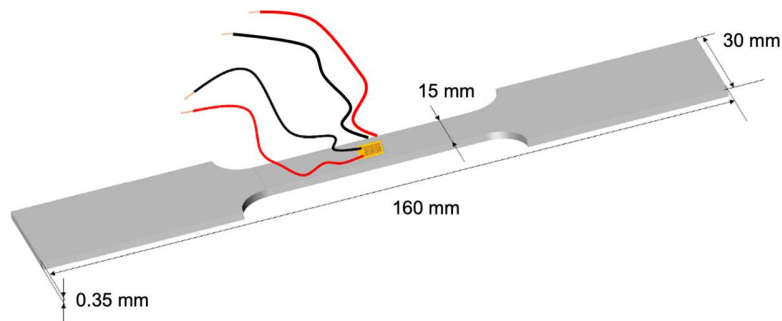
3D view and dimensions of the tensile stress specimens.
